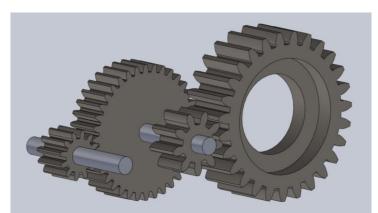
Initial CAD model of layout. Spur gears used instead of helical gears to simplify the geometry in the CAD program.
